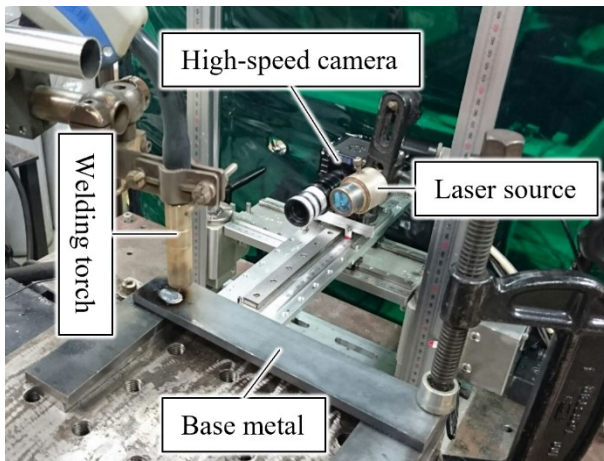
Appearance of experimental equipment for bead-on-plate experiment by conventional gas metal arc welding process.
